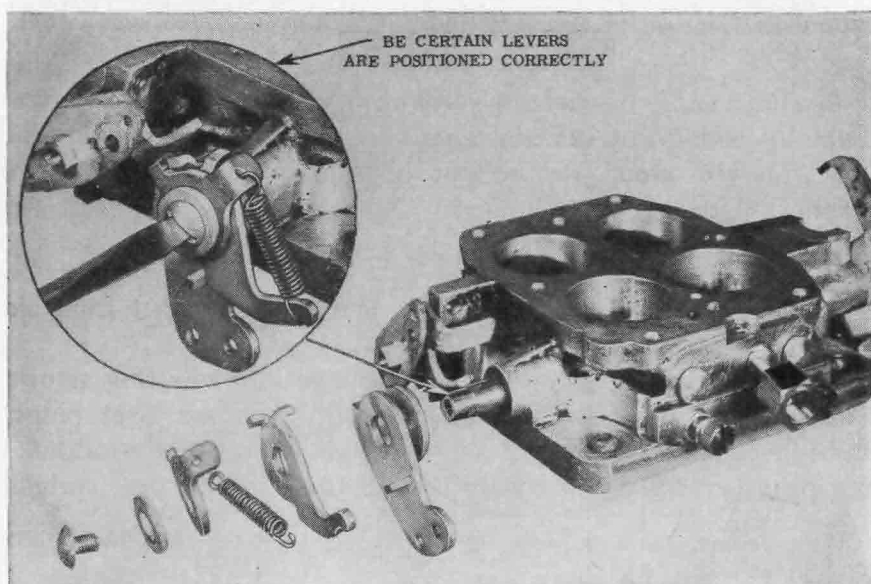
Installing primary throttle levers. (Oldsmobile Division of General Motors Corporation)
